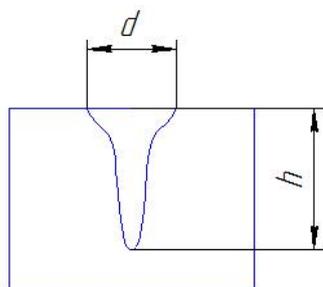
Schematic representation of the joint weld depth and width
